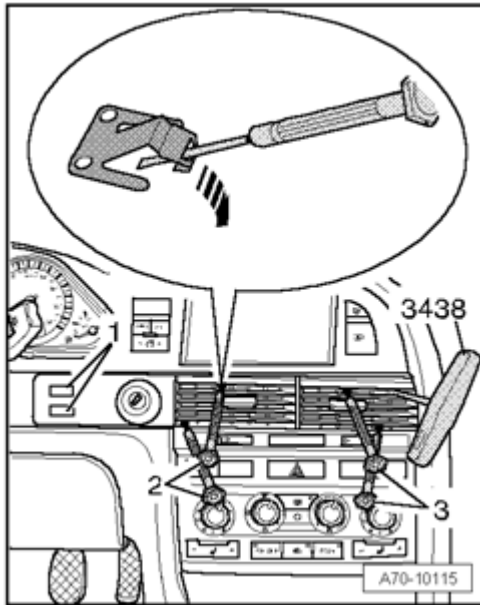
Releasing Spring Pins Of Decorative Panel From Instrument Panel Using Trim Removal Wedge 3409
